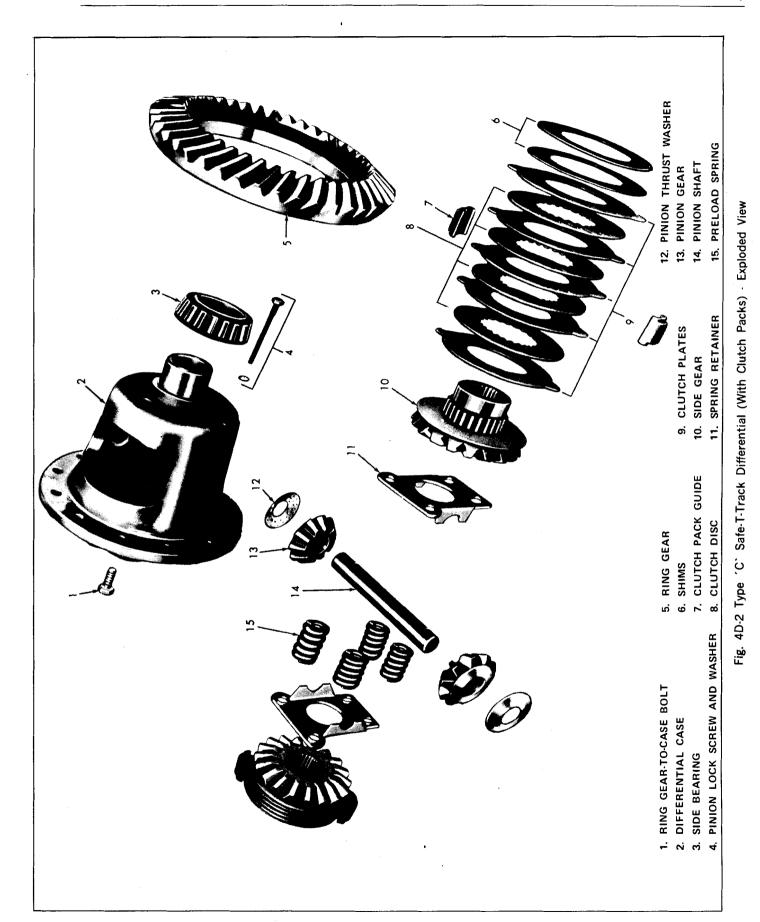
D-2 Type "C" Safe-T-Track Differential (With Clutch Packs) - Exploded View
